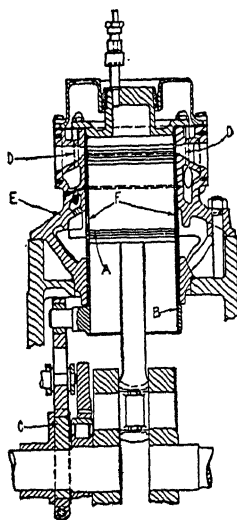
Single-sleeve valve two-cycle C.I. engine.
